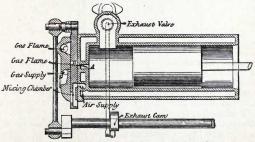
Section of a cylinder of an "Otto" gas-engine.
